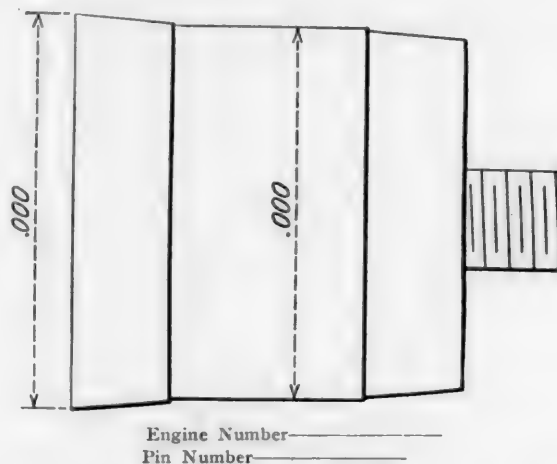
Suggested Sizes for Side Rod Knuckle Pins
